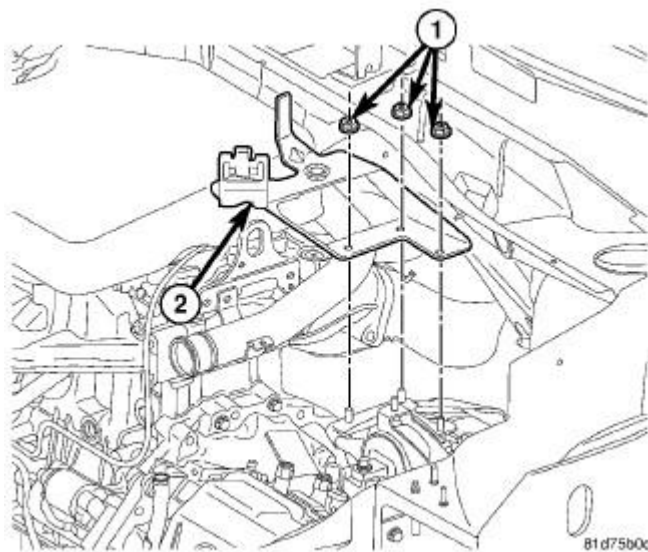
Coolant Overflow Bottle Bracket & Fasteners
